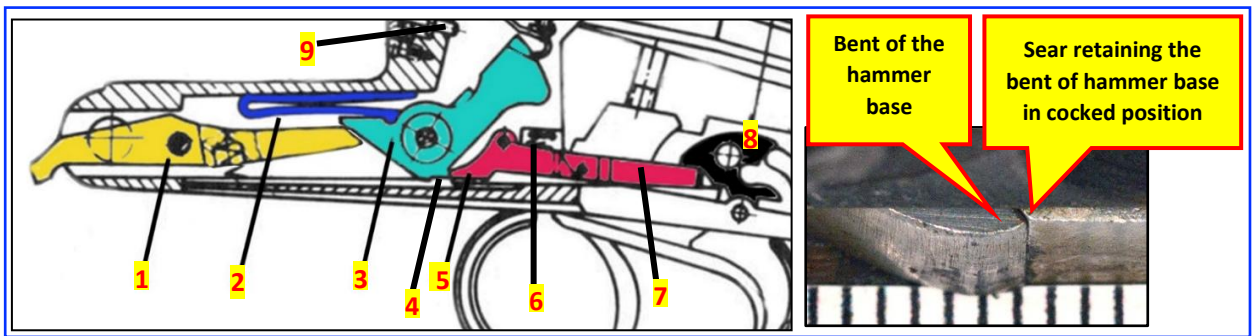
Diagram of relevant internal mechanisms [3] and the visible contact between sear and bent after removing the lower cover of the receiver [4]: 1 - hammer cocker; 2 - hammer spring; 3 - hammer in cocked position; 4 - bent of the hammer base; 5 – tip of sear, retaining the hammer in cocked position; 6 - sear spring; 7 - sear lever; 8 - safety barrier activated; 9 - firing pin.
